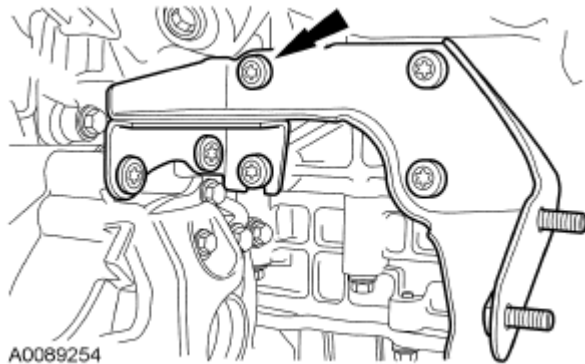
Locating Halfshaft Support Bracket & Bolt
